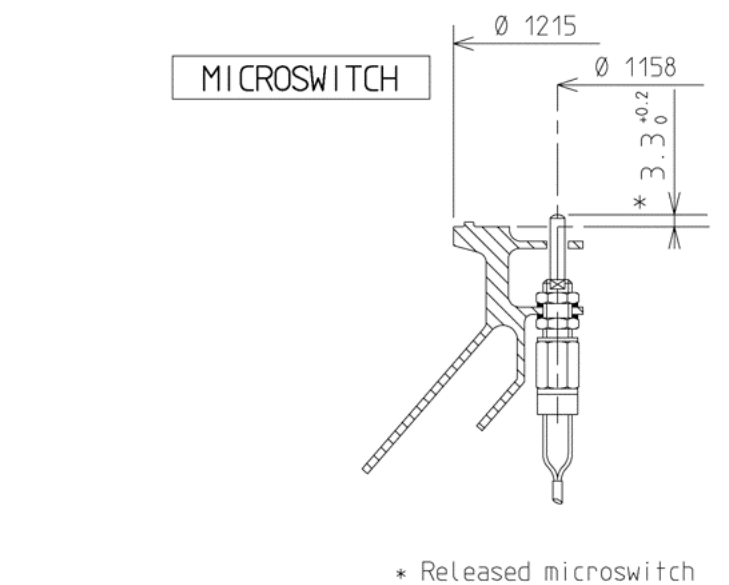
Adaptor 1194V5 - Mechanical interfaces (details)
